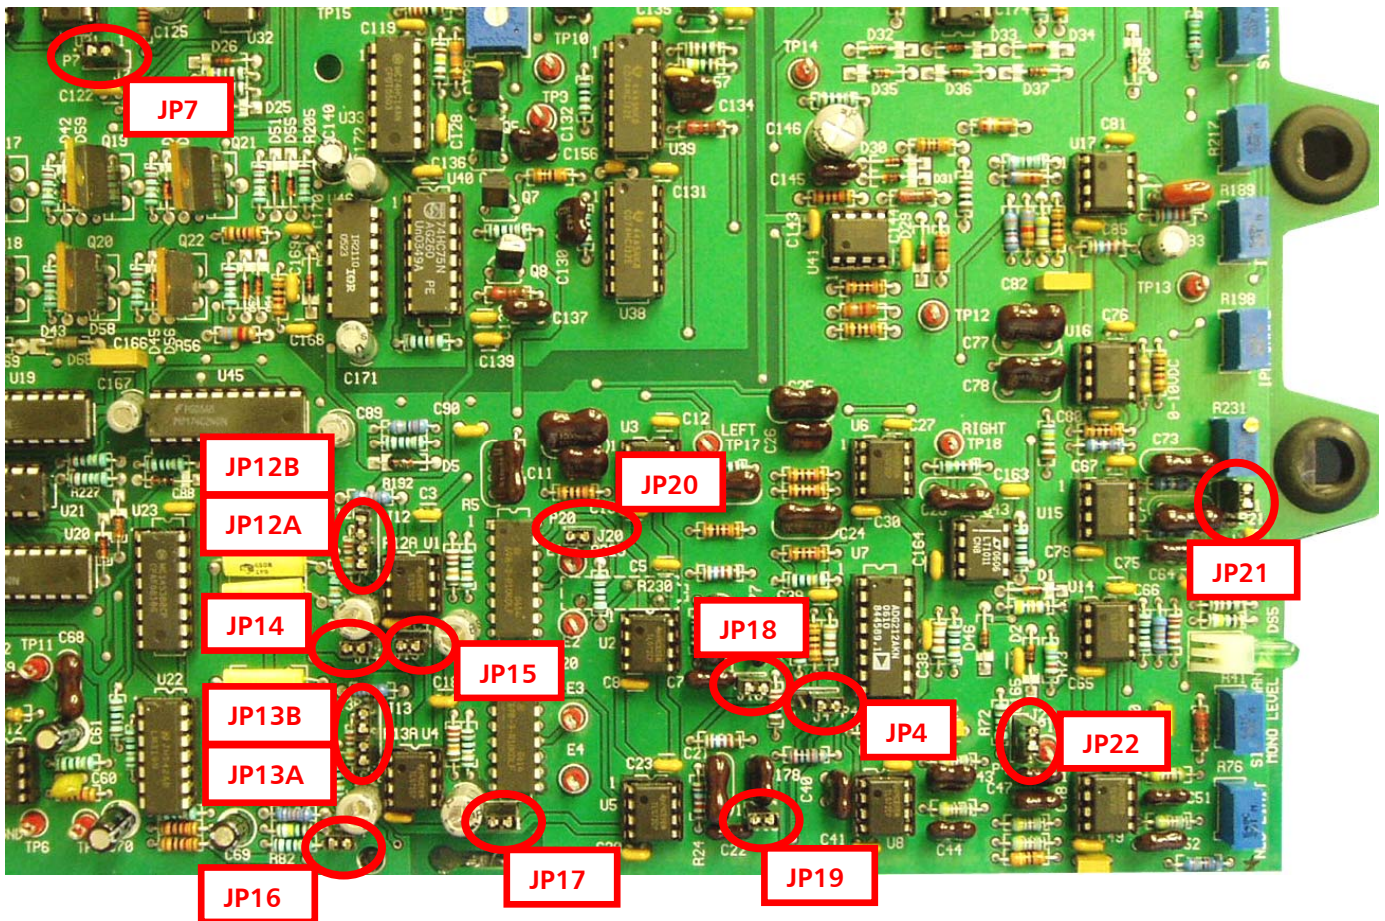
Exciter Control Board (917-0300) Jumper Locations
